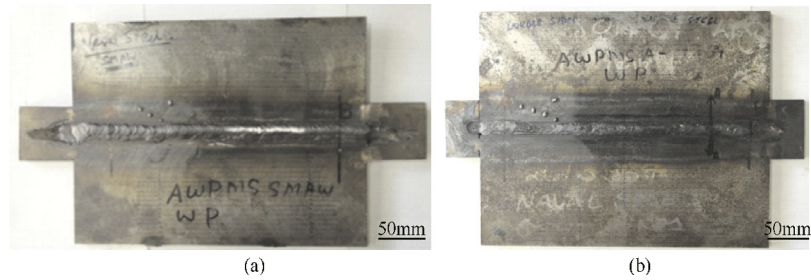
Photos of weld joints (a) SMAW (b) A-GTAW.
